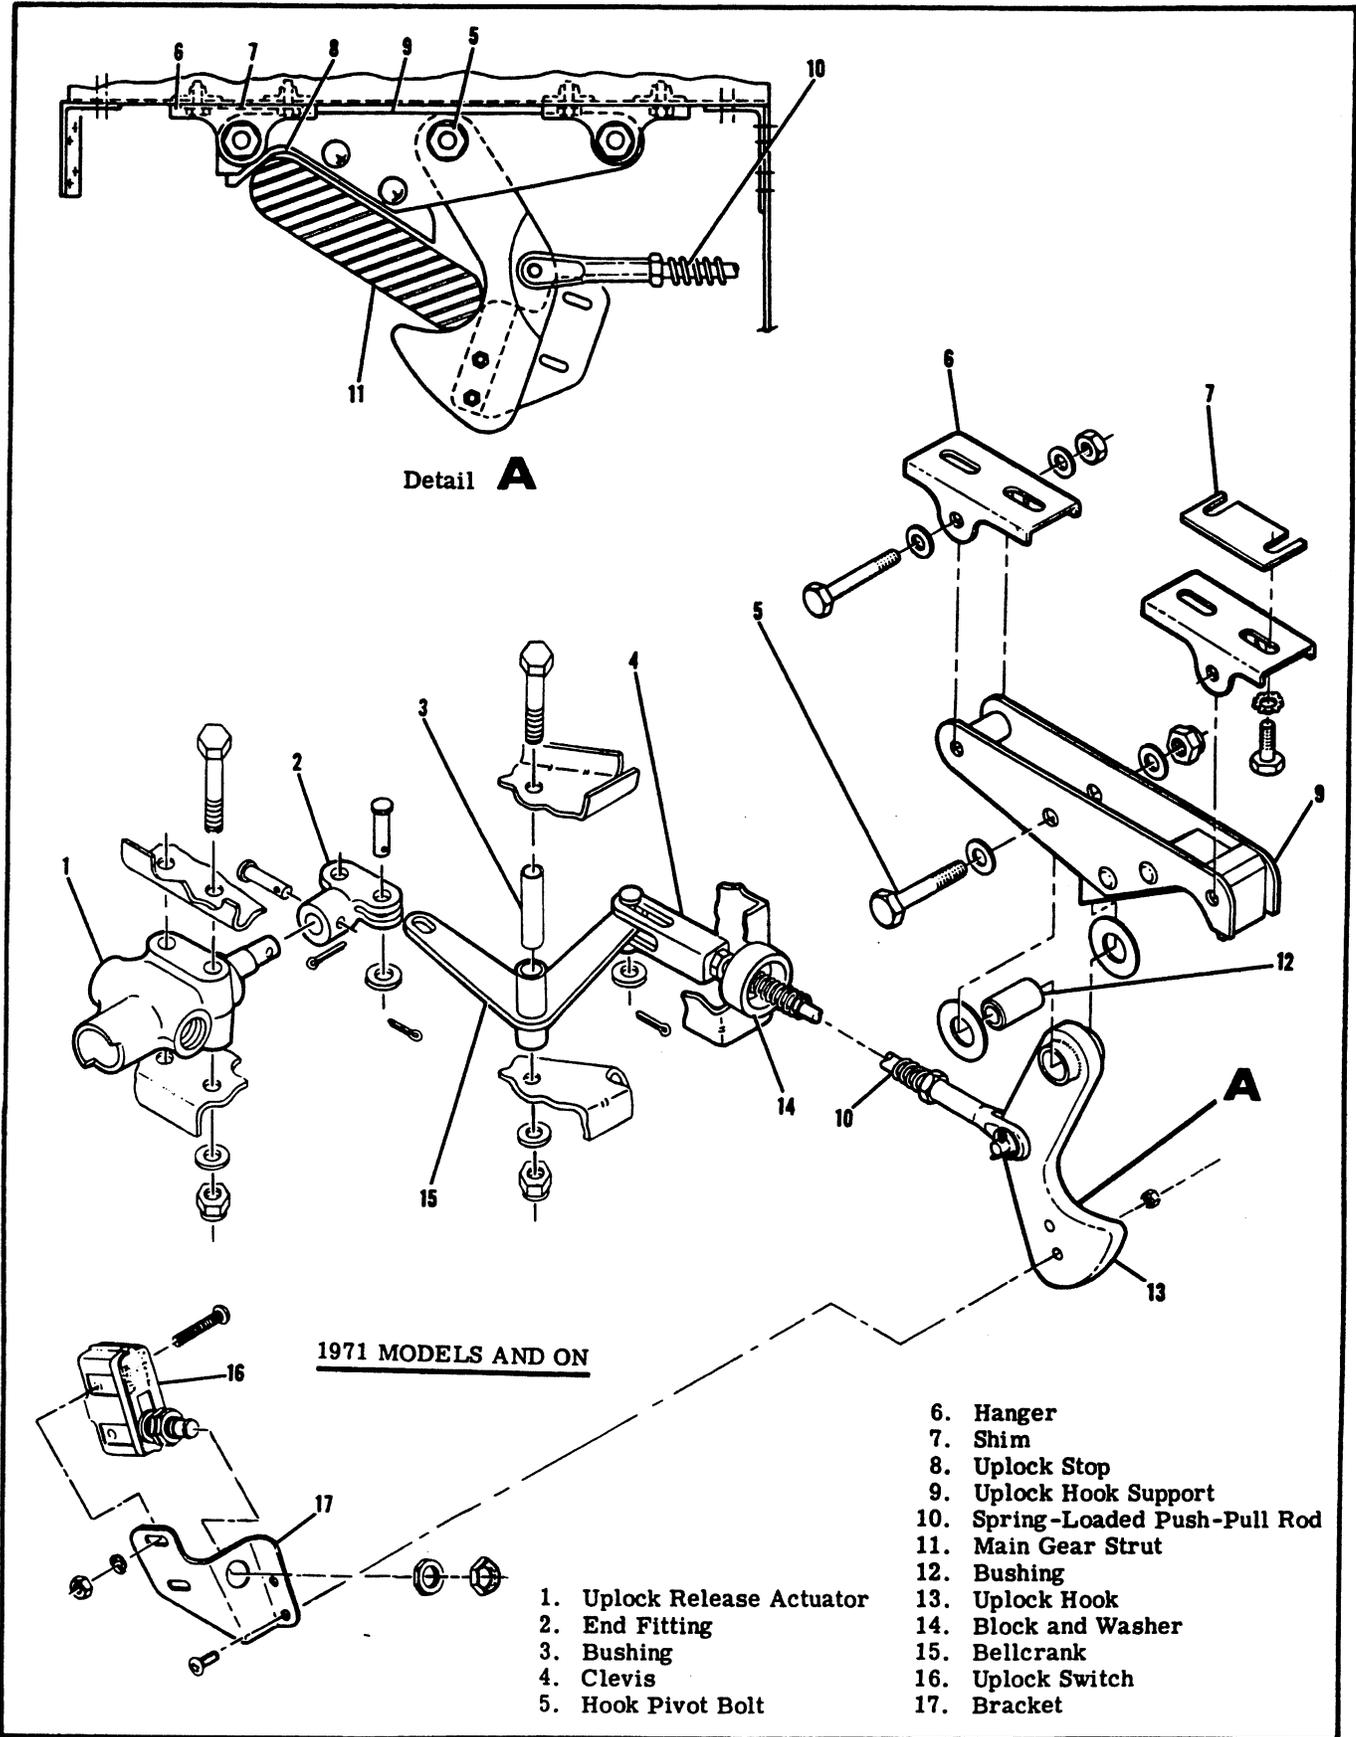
Main Gear Uplock Installation (Sheet 2 of 2)
